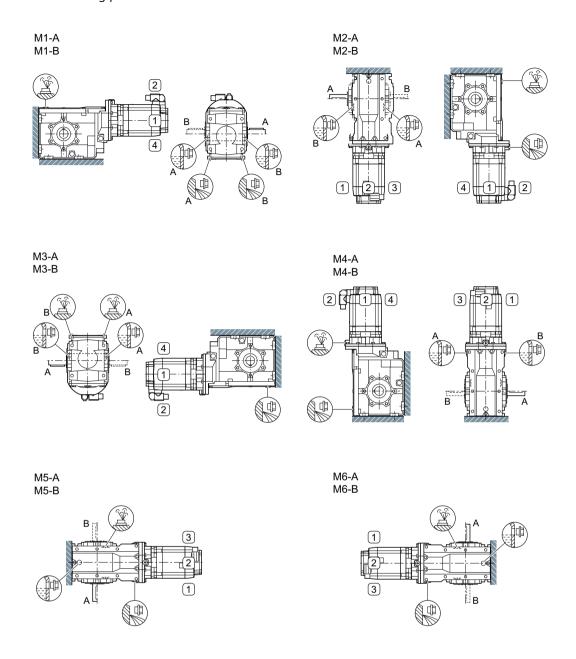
Mounting positions for servo bevel geared motor B, foot-mounted design, frame sizes 39 - 49, 2 stage
